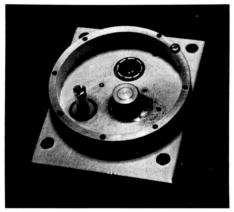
Heater/cathode assembly uses parts from surplus 2C39 amplifier. Material for the mounting plate is 0.093" (2.5mm) brass. Use the mounting plate as a template to locate four 2-56 tapped holes for assembly with the cathode partition.
